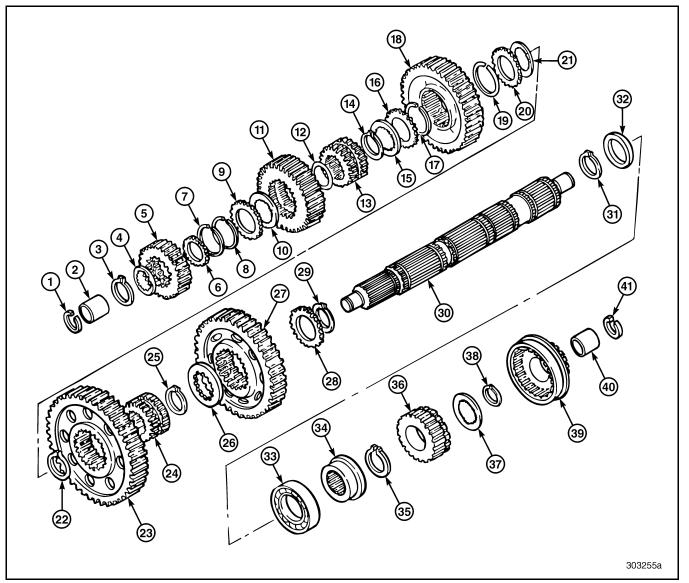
View of Mainshaft and Gears (T313L/T318L Shown)
